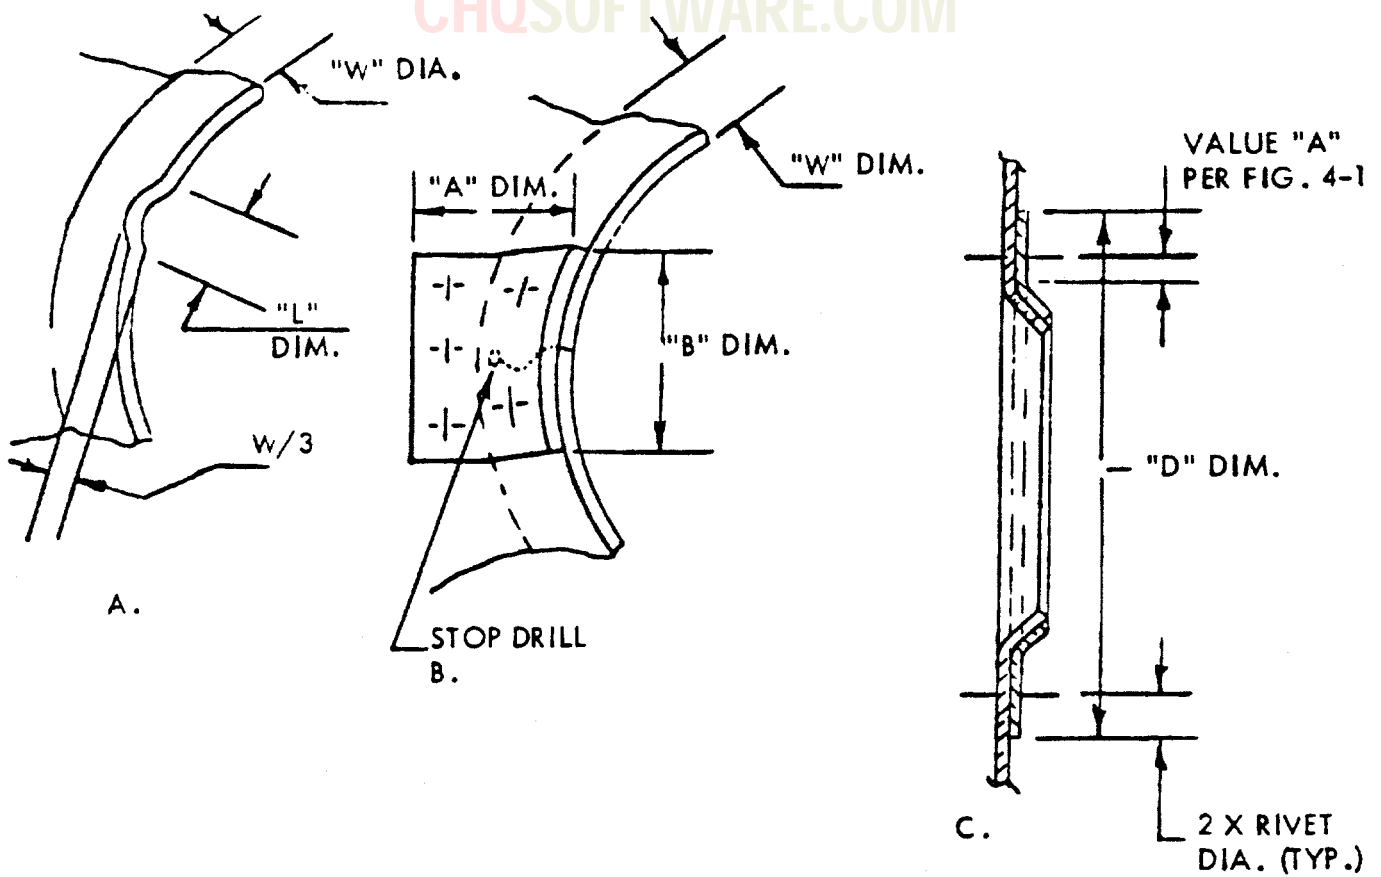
CRACKED LIGHTNING HOLE FLANGE
